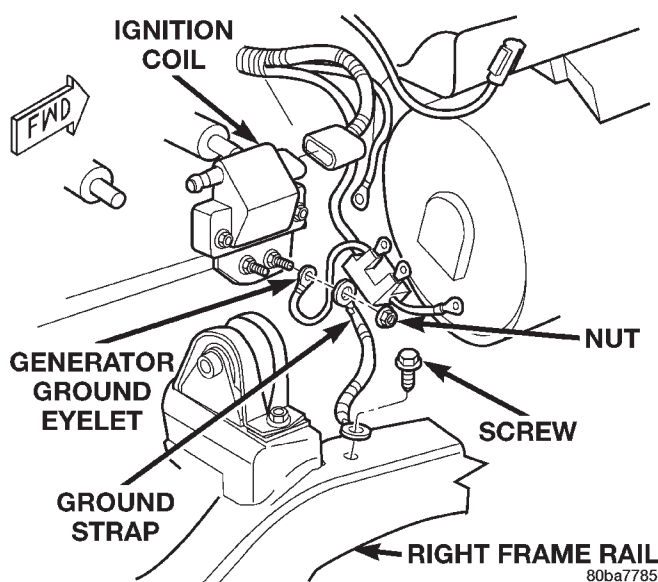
Engine-To-Frame Ground Strap Remove/Install - 4.0L Engine
